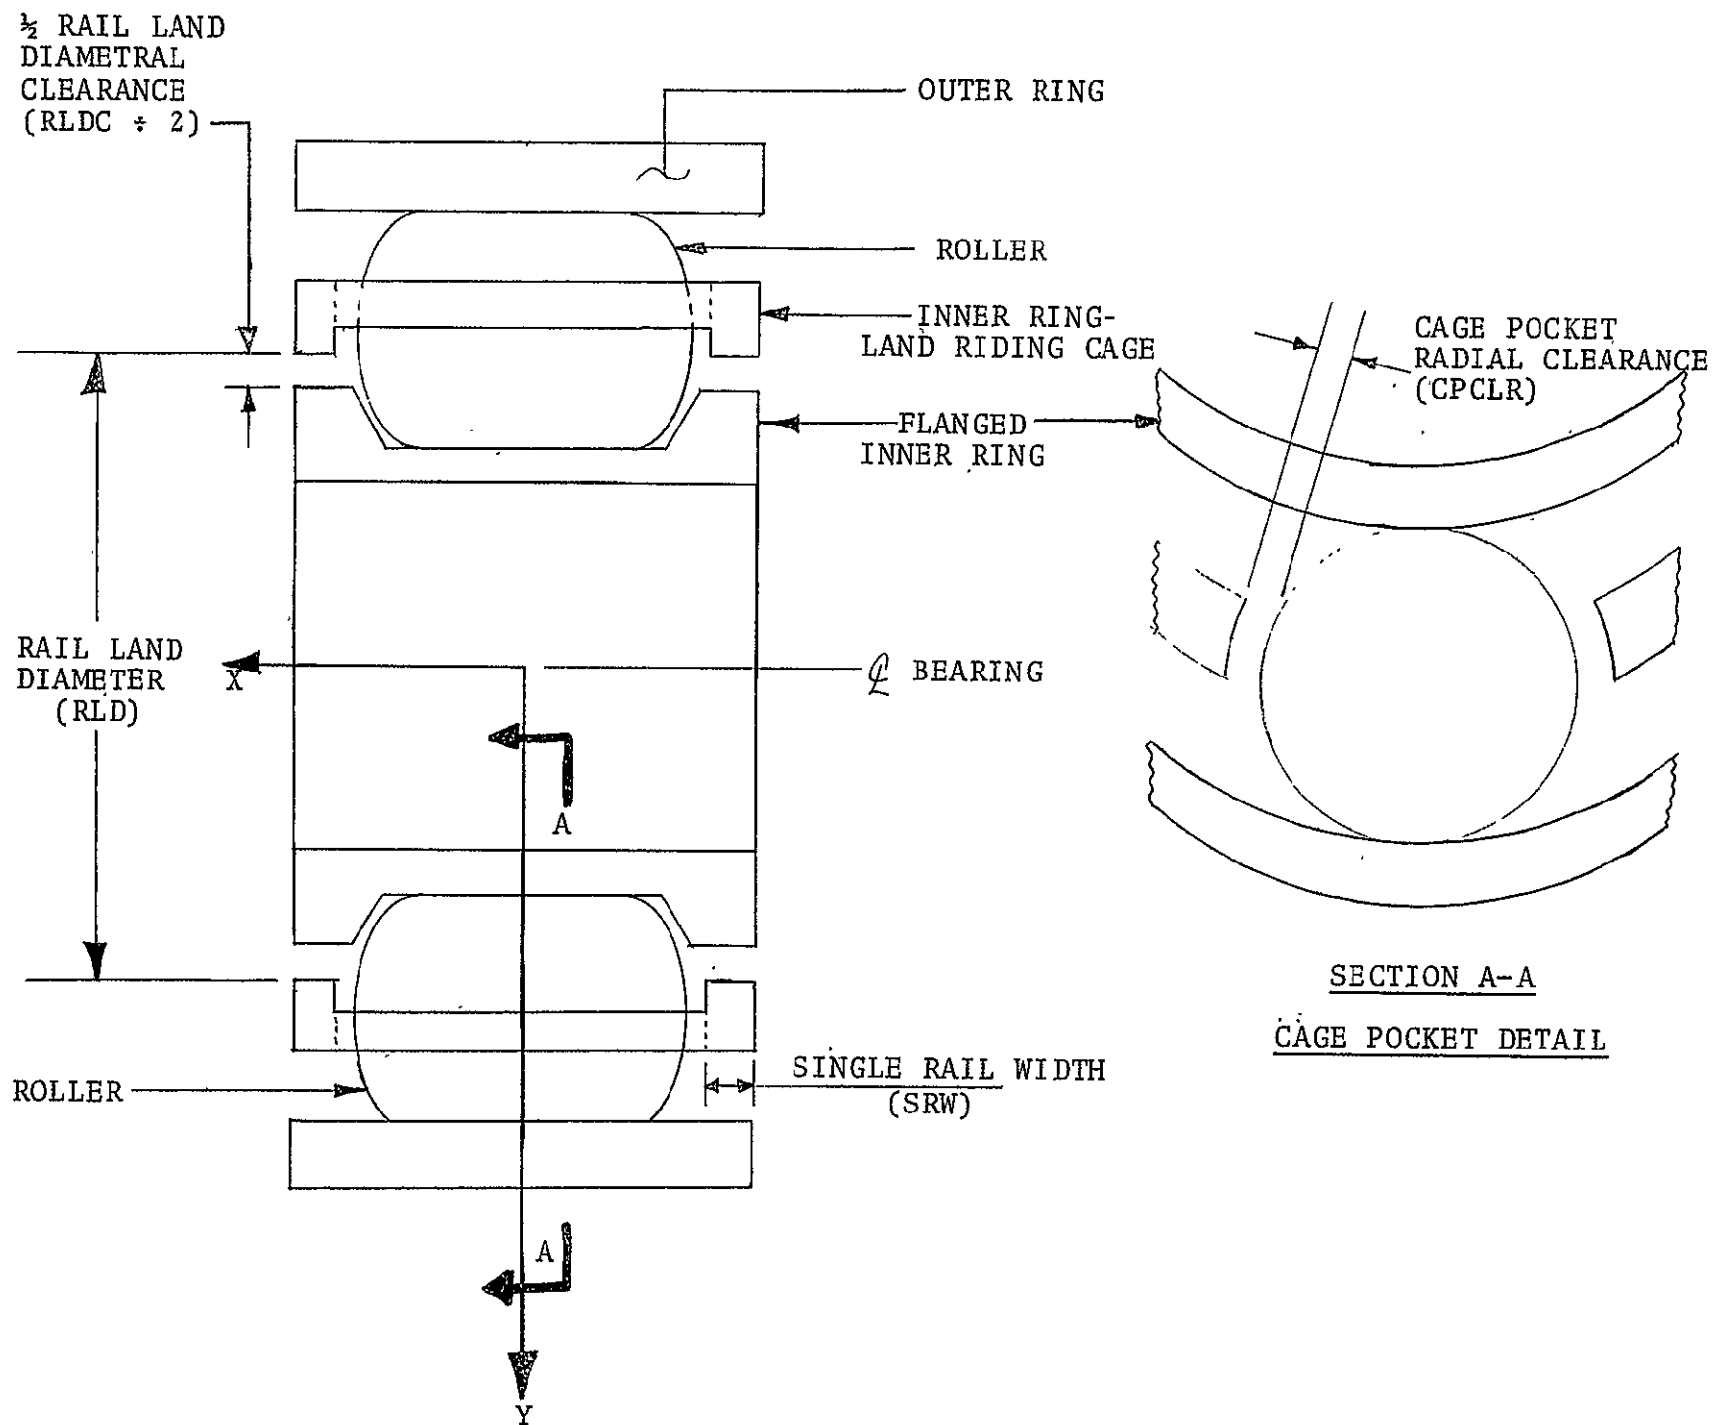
USER INPUT CAGE GEOMETRY.
